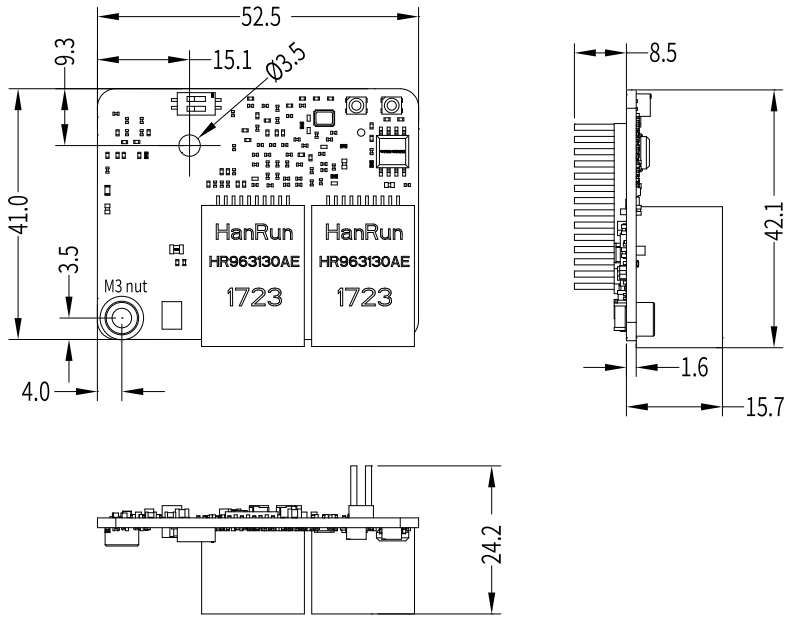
Dimensions of MD-SI-DP1 expansion card
